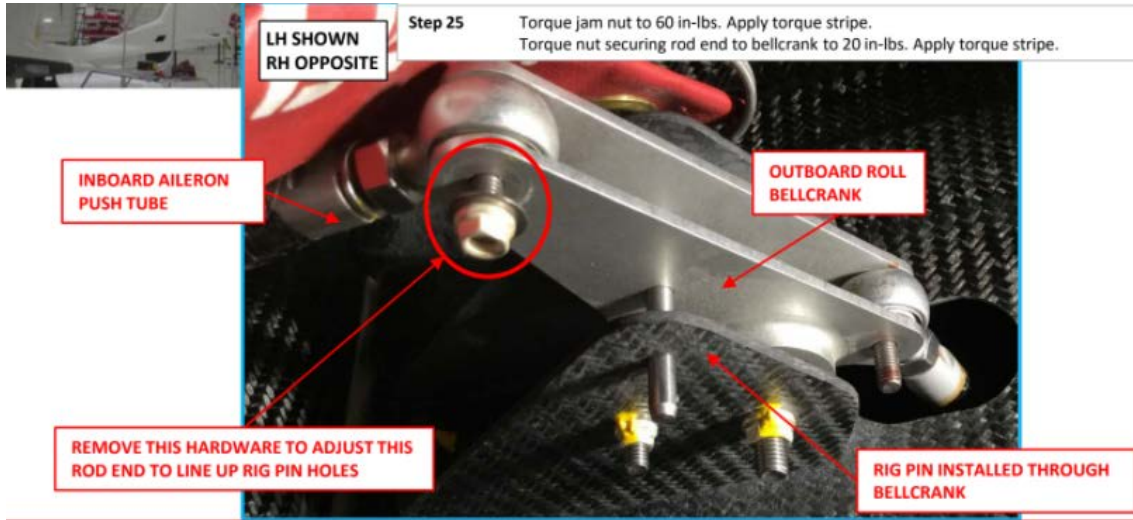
Out board roll bell crank rig pin installation and adjustment.
